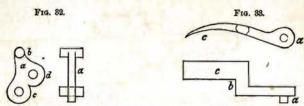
Mainspring-swivel, full size. a, a, body; b, axis; c, tumbler-pin hole; d, finger-pivot hole.
